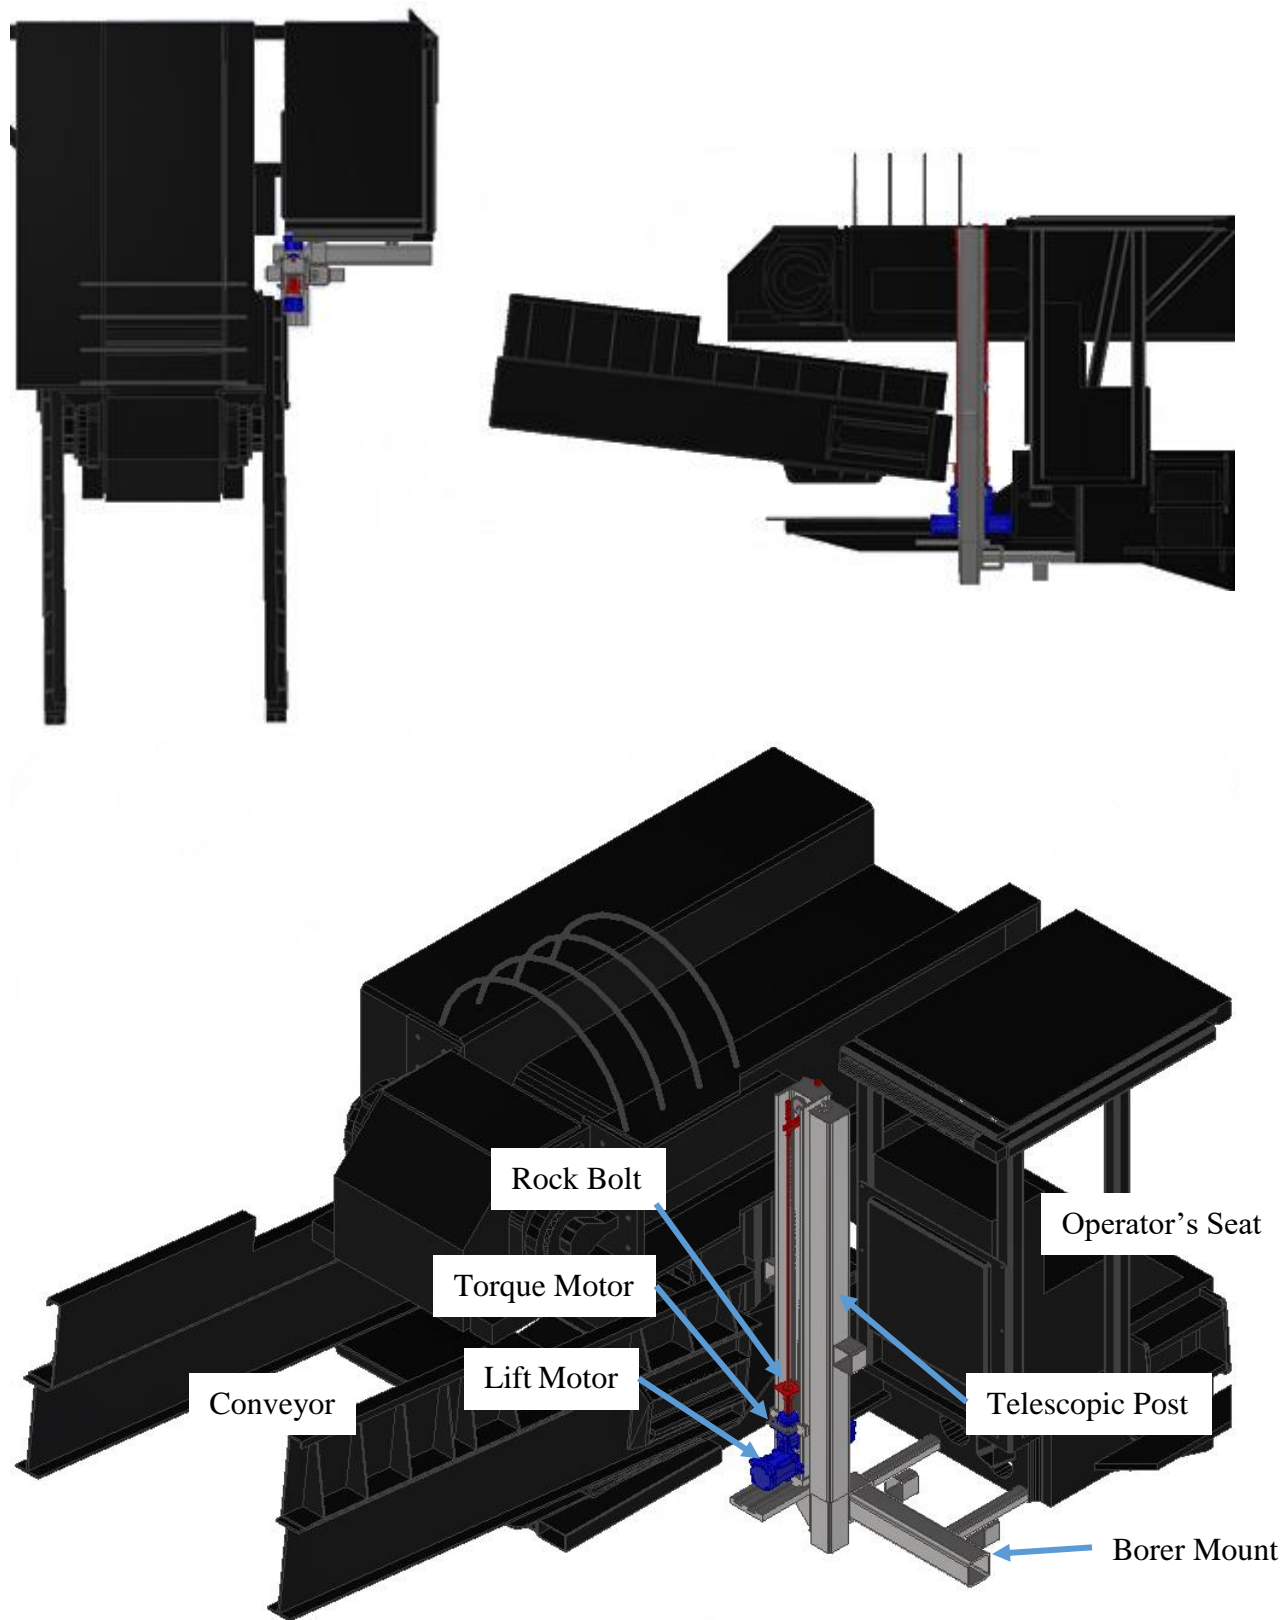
Top view, side view, and isometric view of the complete mounted bolting system, shown top left, top right, and bottom respectively
